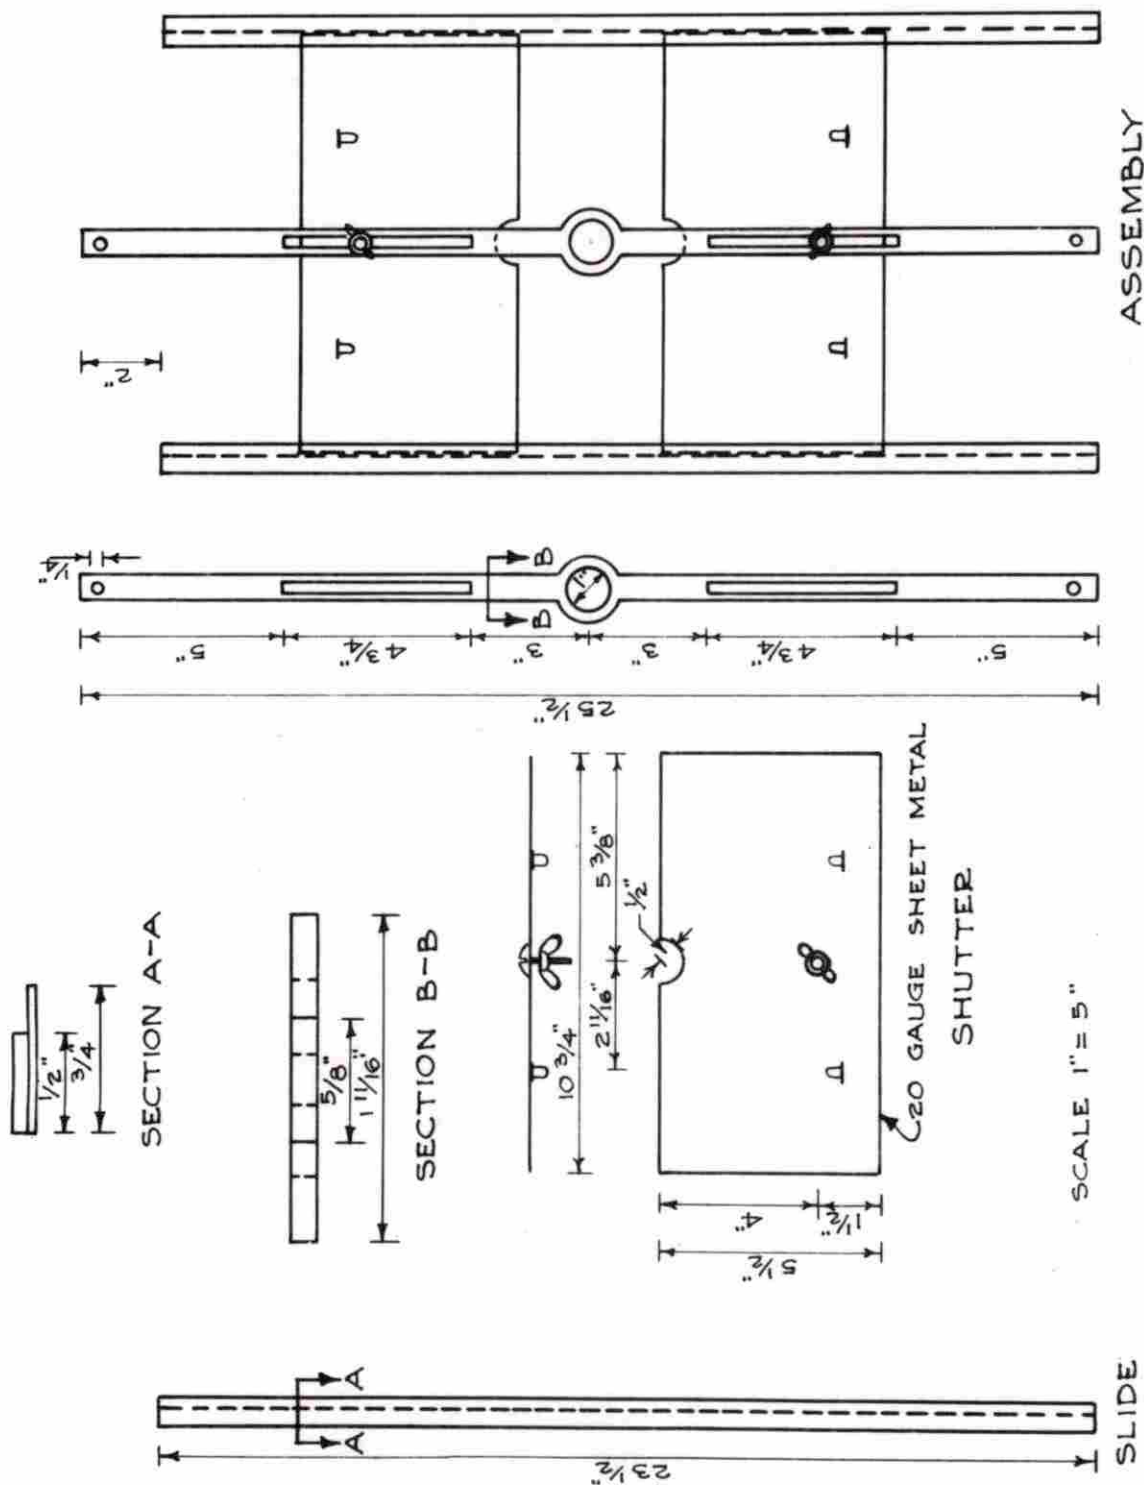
INTAKE SHUTTER ASSEMBLY FOR BLOWER
